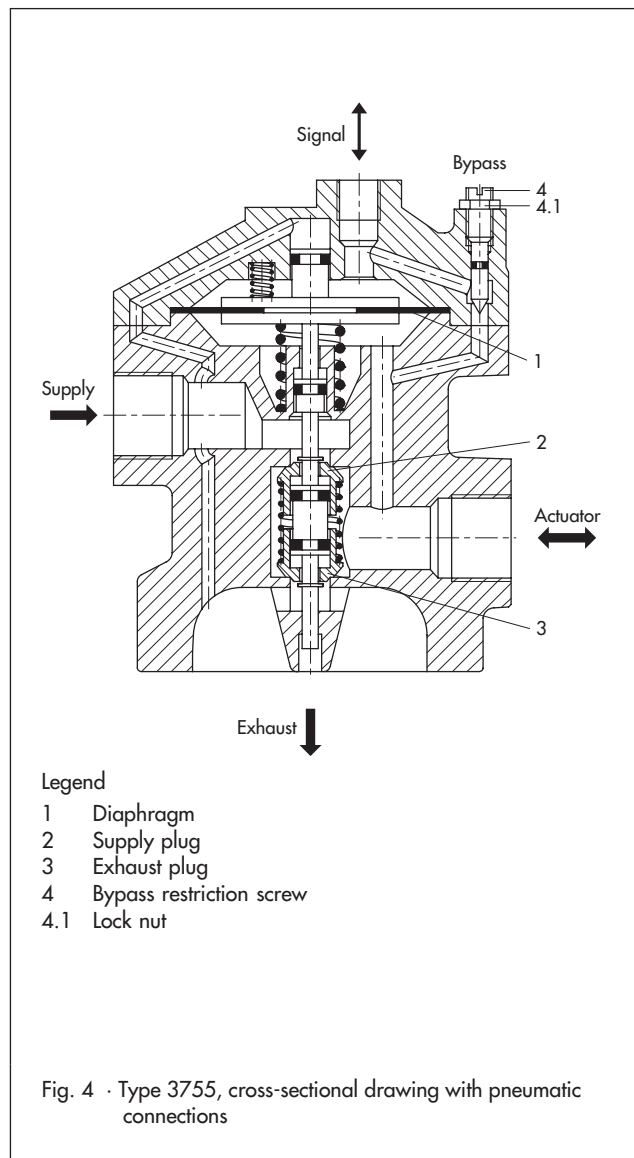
· Type 3755, cross-sectional drawing with pneumatic connections
